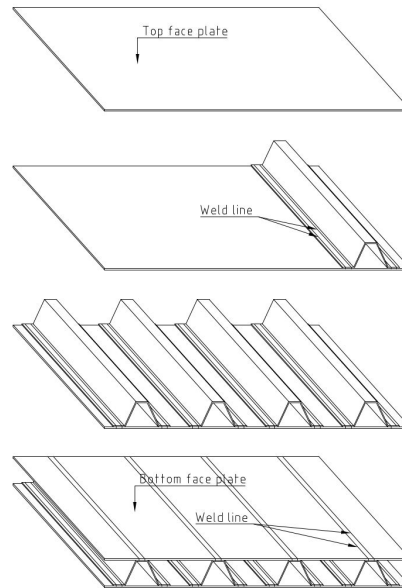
Production procedure for the sandwich panel with V-core. Spot welding and joint between core and lower chord is excluded.
